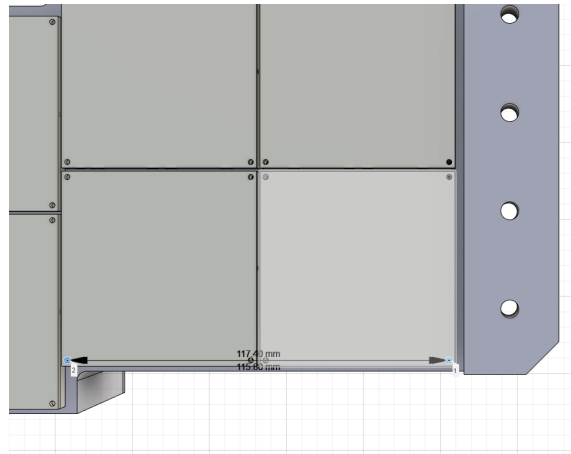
Measuring the dimensions of the CAD document to be translated into ROOT using Autodesk Fusion 360's inspect tool
